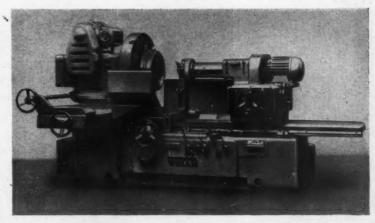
Wotan type S 313/12U hydraulic grinding machine set-up for operations on an inner ring for a double-row taper roller bearing
